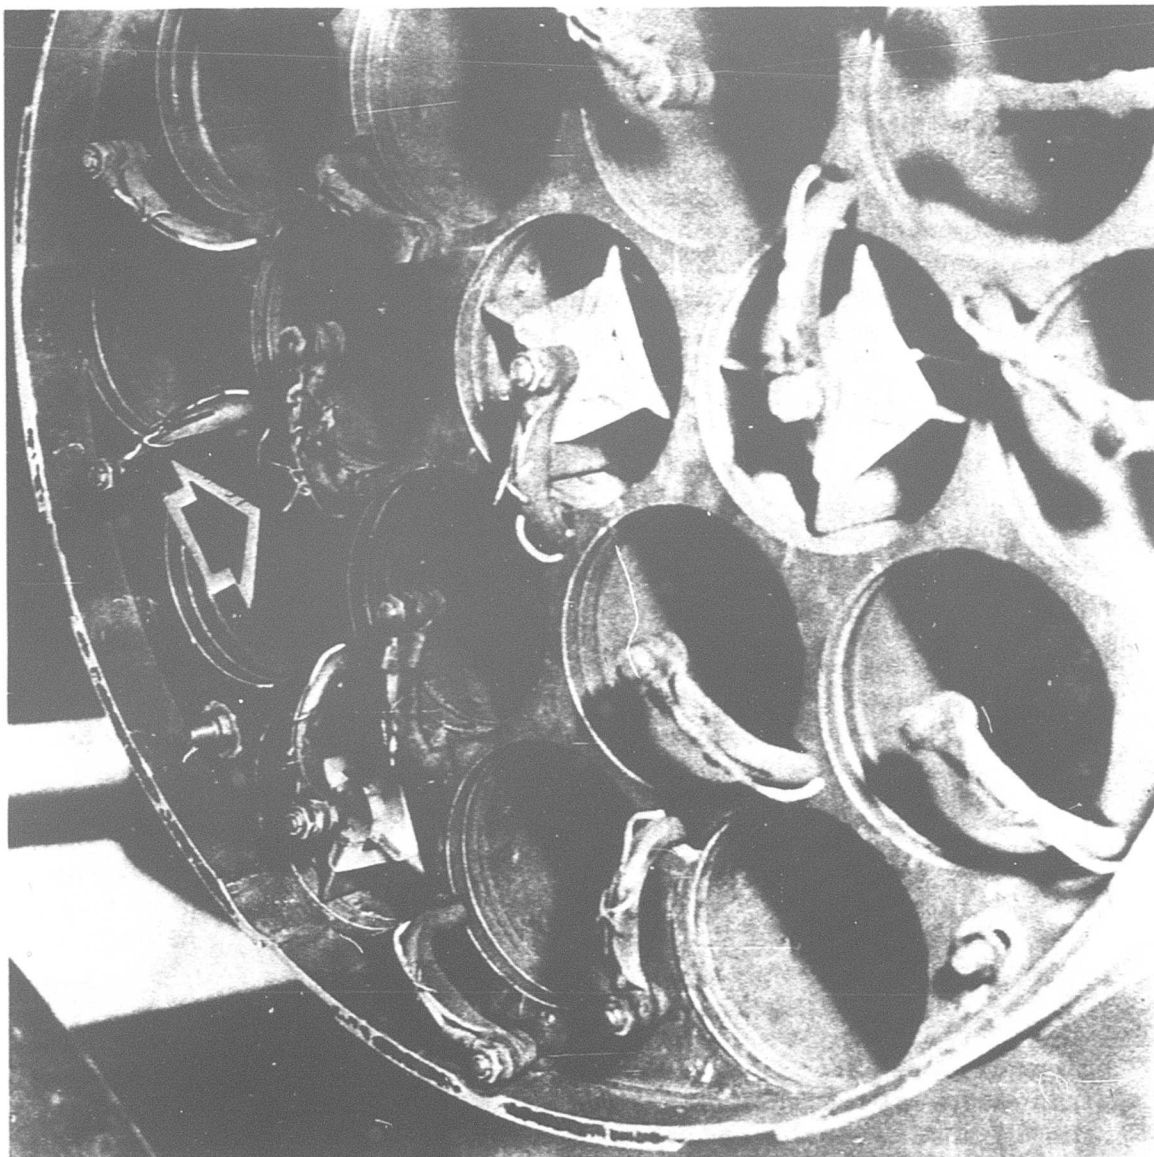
Rear view of XM200 showing wires damaged by rocket blast.
